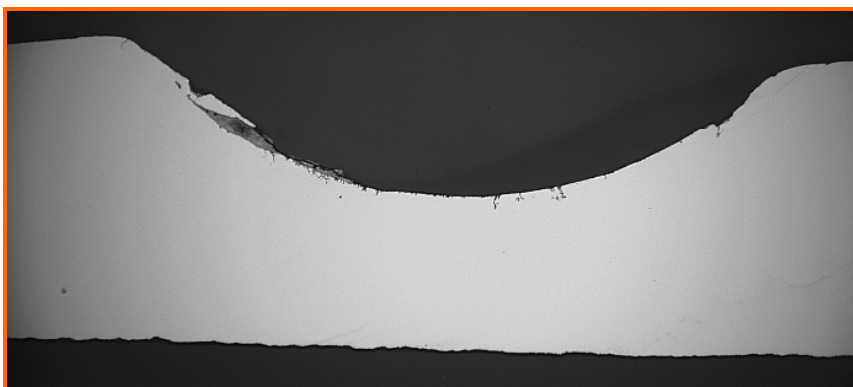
Cross section. Local wall thinning. Minimum wall thickness was measured to 3.2 mm. Not etched. 7 \times .
